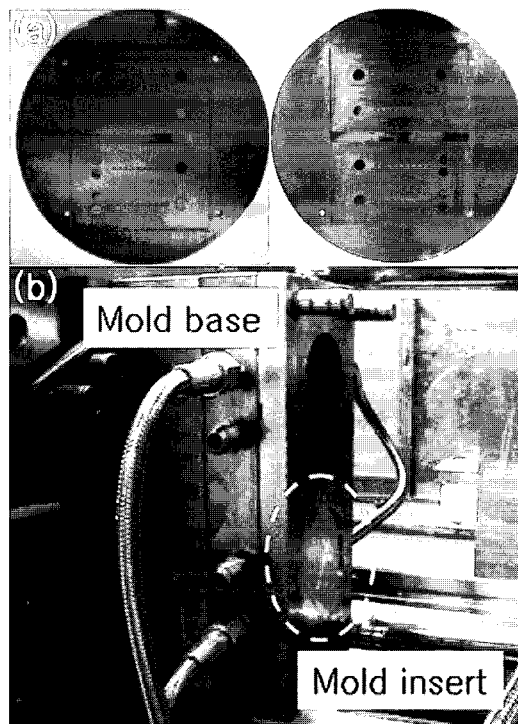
Real photographs (a) nickel mold inserts, (b) mold insert installed in the mold base of the injection molding machine
